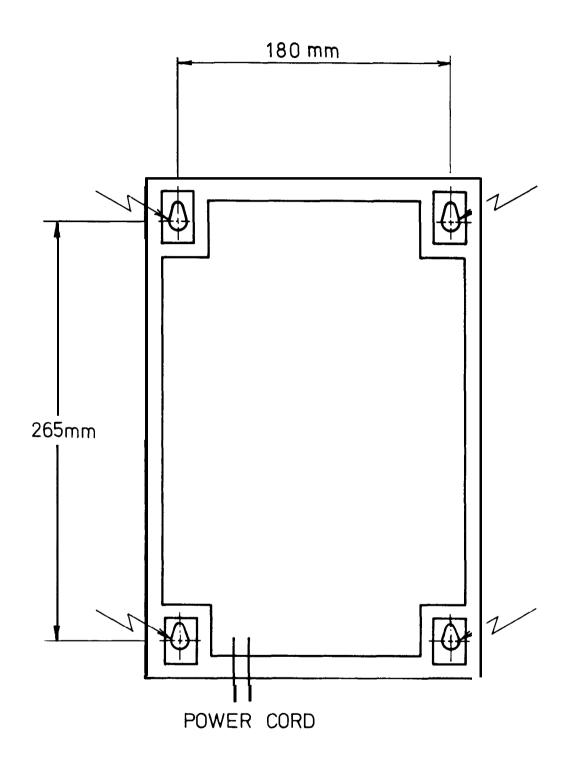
WALL MOUNTING OF MAIN EQUIPMENT
